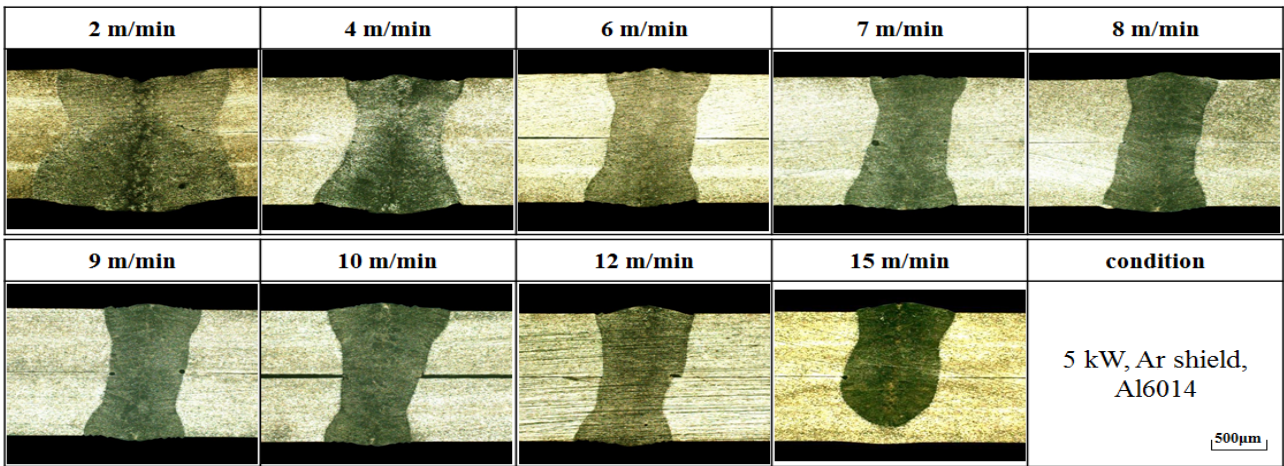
Cross-sectional images of Al6014 laser lap welding by change welding speed at 5 kW laser power
